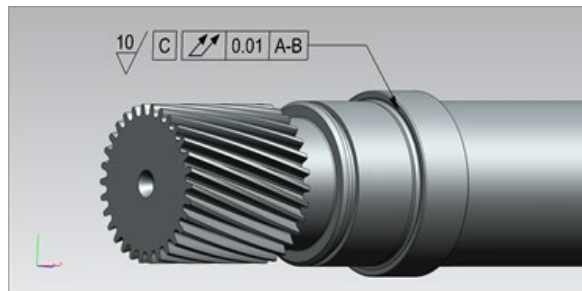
Enriched STEP file of exemplary rotor shaft with the active view of an axial bearing seat.
